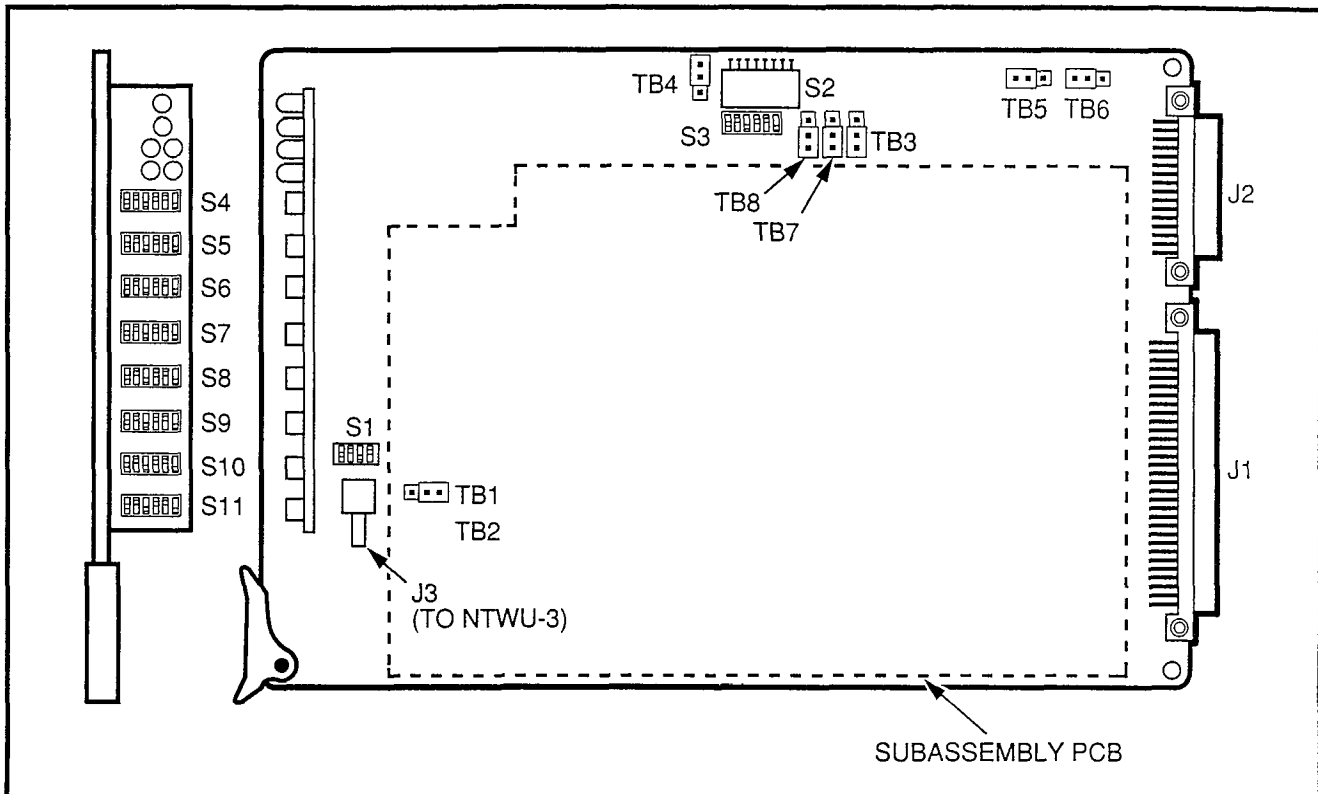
NDTU PRINTED CIRCUIT BOARD LAYOUT
